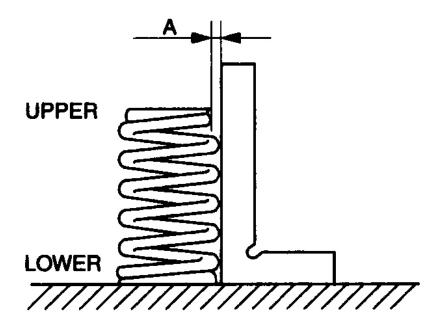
Performing Valve Spring Inspection Courtesy of MAZDA MOTORS CORP.
